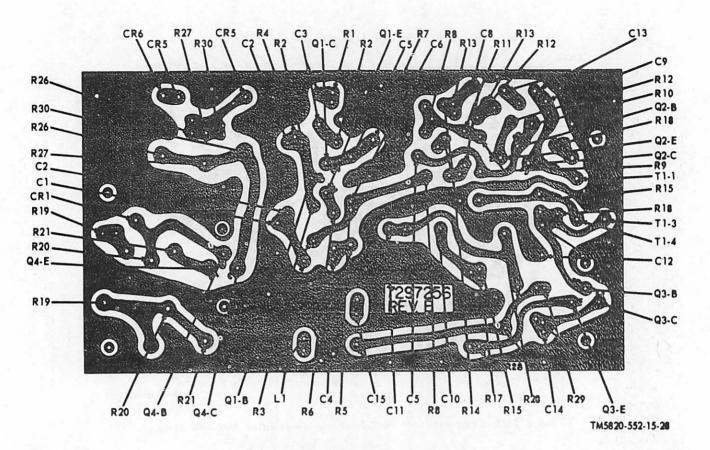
Component terminal locations, modulator and battery test assembly A4A2.
